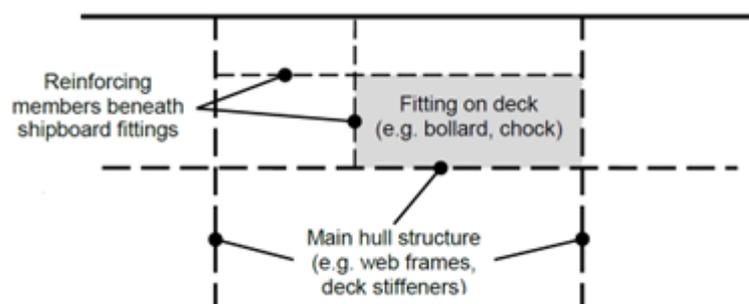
Sample arrangement of reinforced members beneath shipboard fittings
